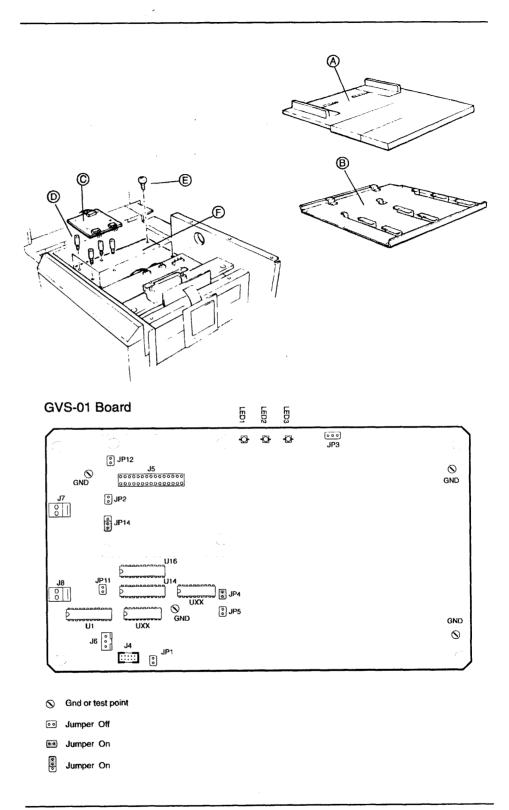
Removing the IS520 Memory Board (GVS-01)
